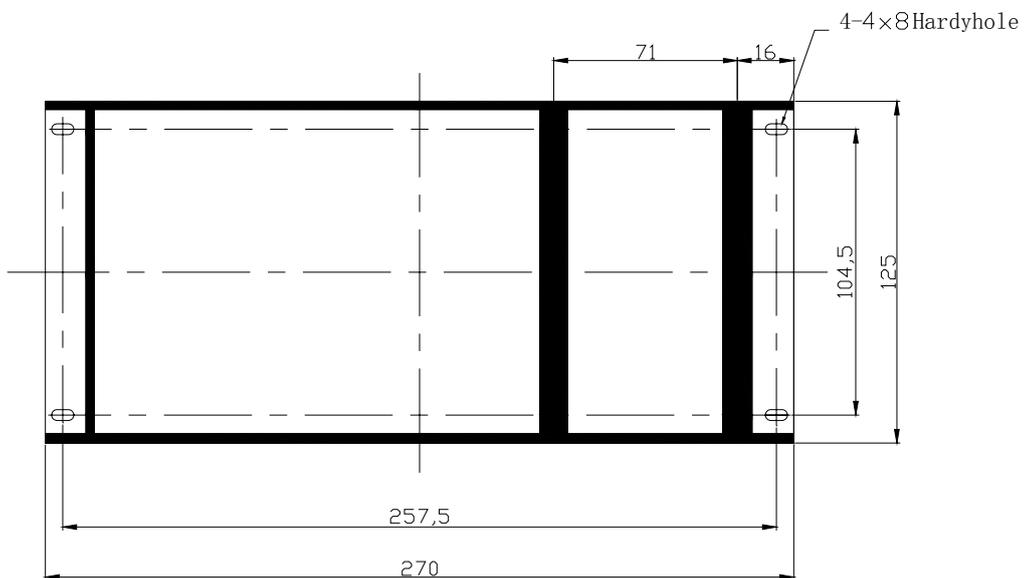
(B) Mounting Dimensions of Car Call Board
